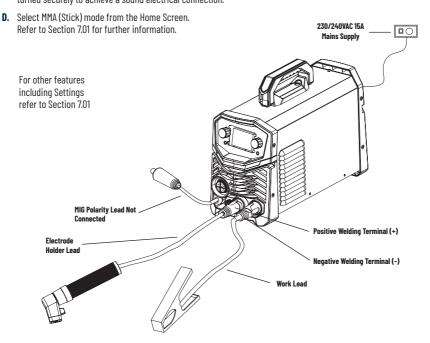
Setup for STICK (MMAW) Welding
